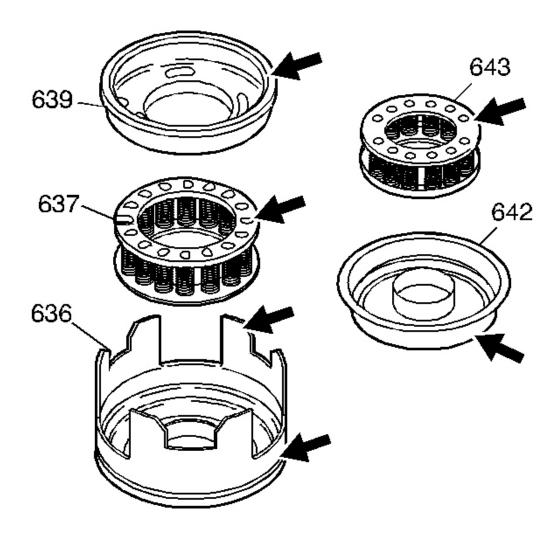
Inspection Areas On Input Clutch Piston Components Courtesy of GENERAL MOTORS CORP.
